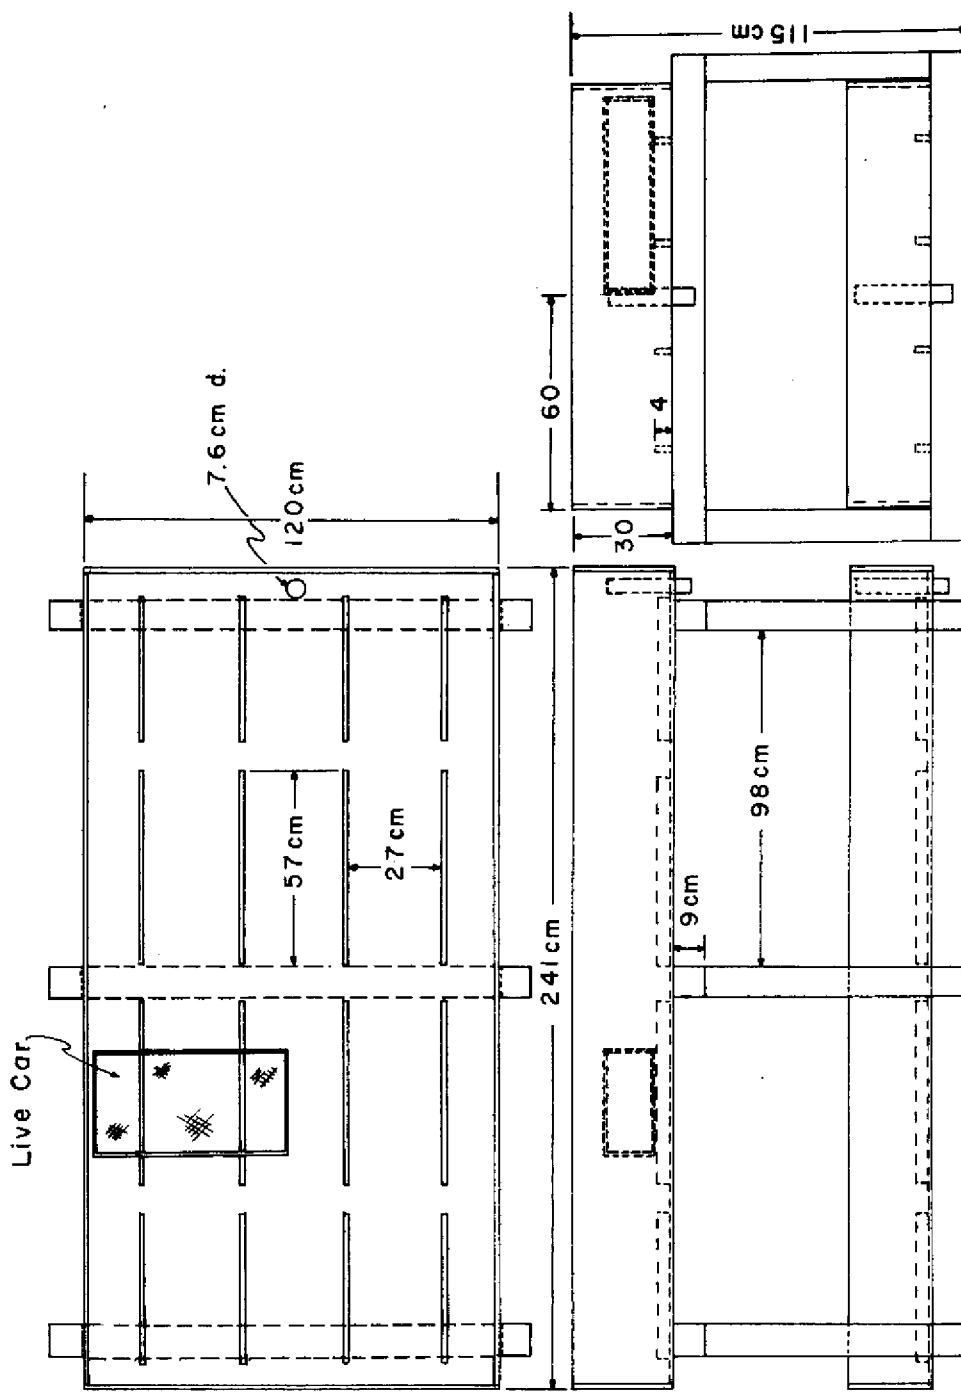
Double layered, multipurpose storage units (constructed from exterior plywood reinforced with fibreglass cloth and epoxy resin and mounted on a wooden frame) can be used to store harvested worms, rear larval worms or breed stock. Each layer normally would hold 12 live cars each containing 1,000 worms. Only one live car is shown in position.
